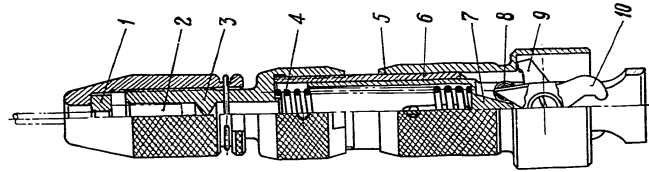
ENGAGING LOCK FOR CARGO SLING
